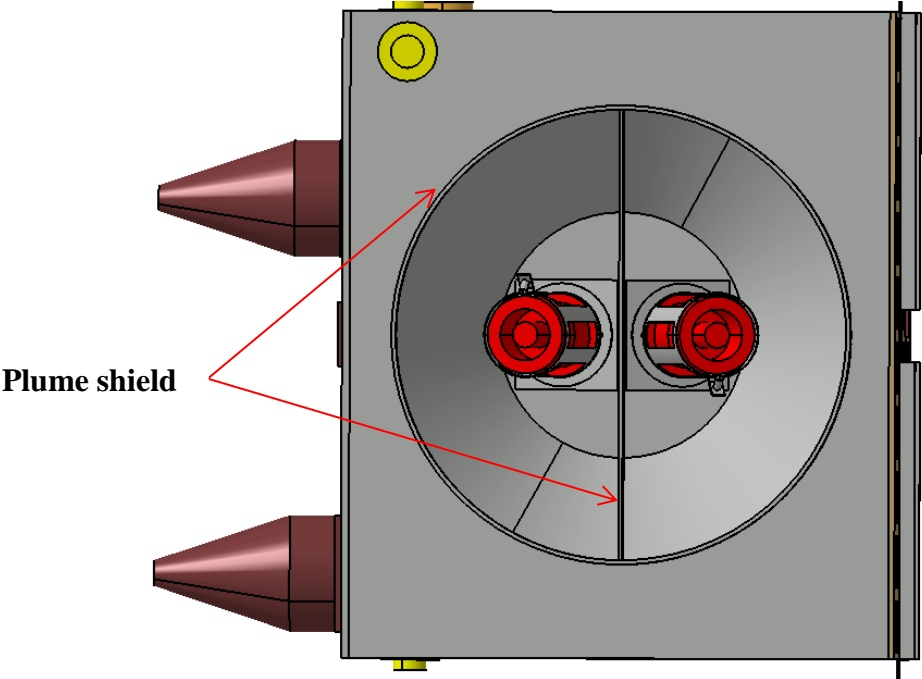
External view of the deployed platform, in front of the *thrusting module*.
